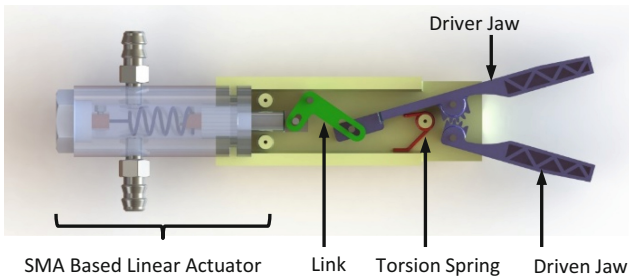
Conceptual design of the finalized gripper mechanism combined with the linear actuator.
